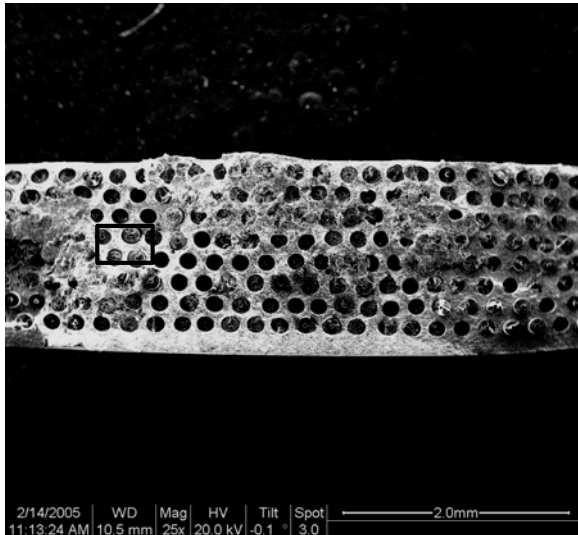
Specimen TMC-06, overall view of fracture surface
